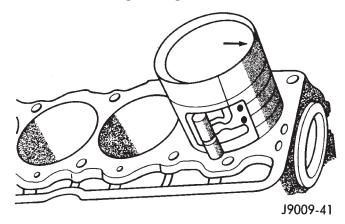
Removal of Connecting Rod and Piston Assembly
